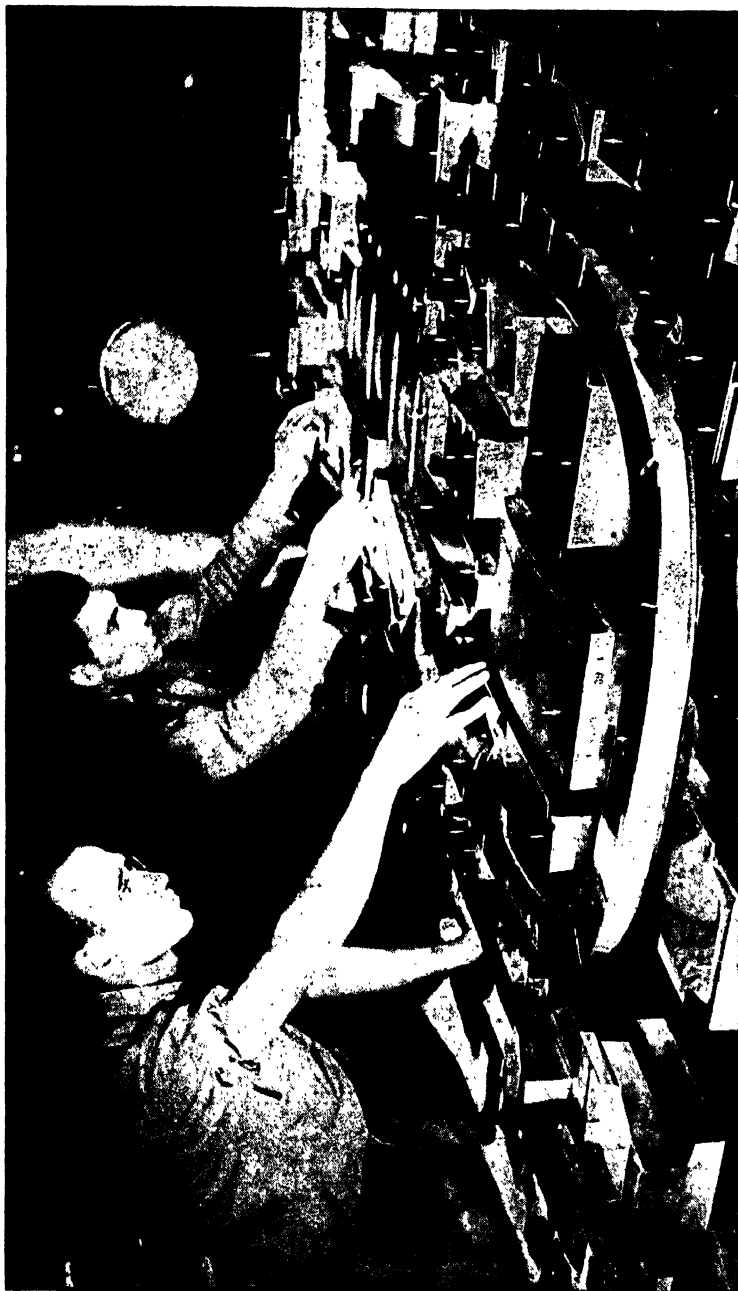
PLATE XX.—One press stroke forms many different airplane parts. These press operators are locating Duralumin blanks of many shapes over pilot pins in punch and die tools. The tools are arranged on a movable plate, which is then shoved under the platen of confined rubber in a large hydraulic press. When the platen descends upon the blanks, the pressure of the rubber forms them over the dies, which are of the various shapes required in aircraft assemblies. (Cleared by the War Department for Lockheed Aircraft Corporation.)
